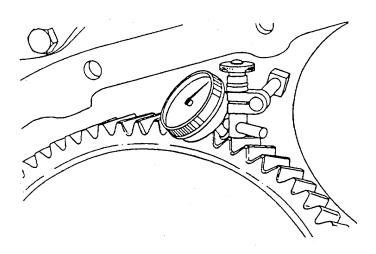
Camshaft Gear Backlash Measurement.
